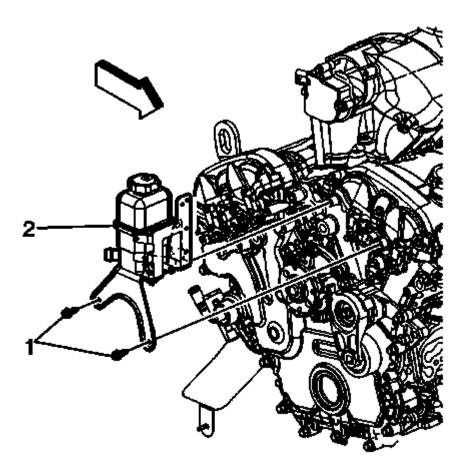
Identifying Power Steering Fluid Reservoir Bracket & Bolts Courtesy of GENERAL MOTORS COMPANY
